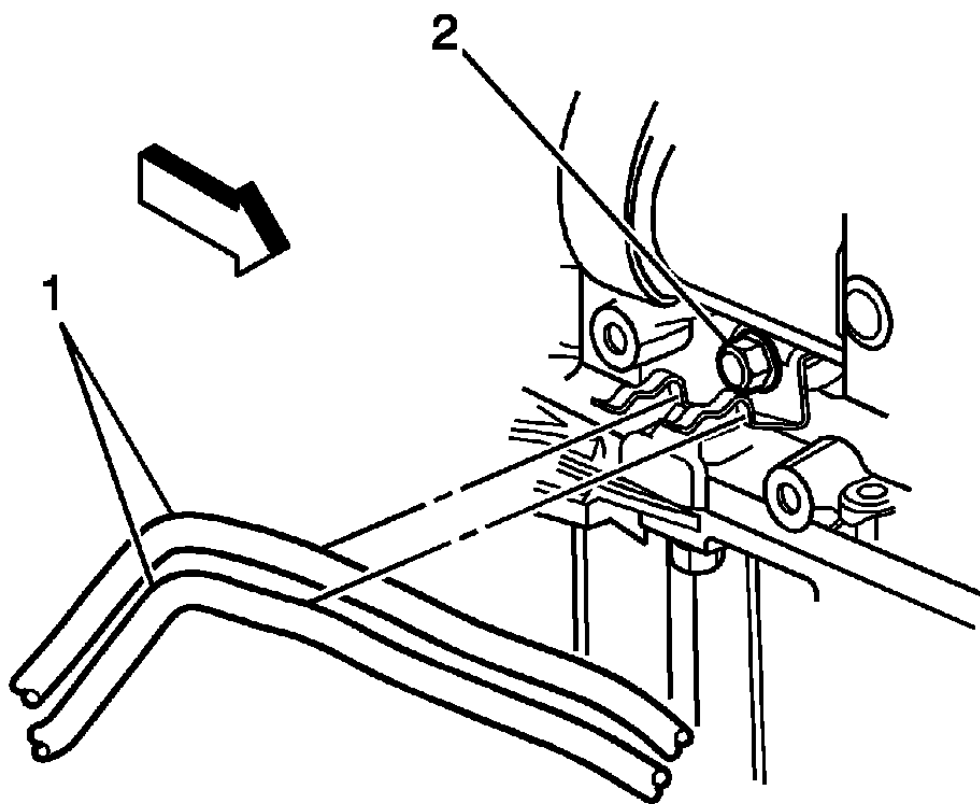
View Of Transmission Oil Cooler Pipe Bracket Bolt
